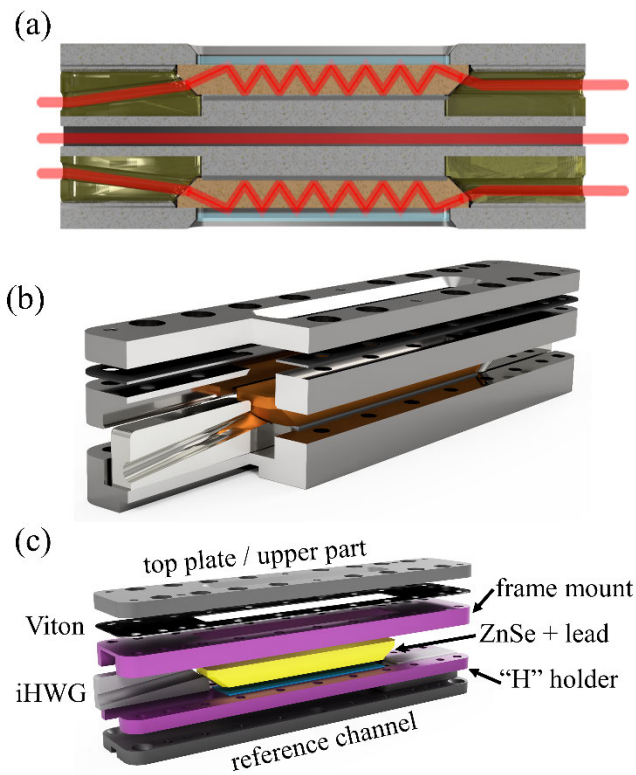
Developed sensor cell is composed of individual components, which can be tailored to any desired measurement scenario in terms of materials and dimensions. (a) Schematic of the transducer assembly. In red, the laser beam is schematically shown indicating the internal reflections within the ATR waveguide. IR radiation is guided via iHWGs to the IRE and via another iHWG to the detector. (b) CAD rendering illustrating the iHWG coupling. (c) Labeling of the individual parts, which are used for establishing the sensor cell assembly.
